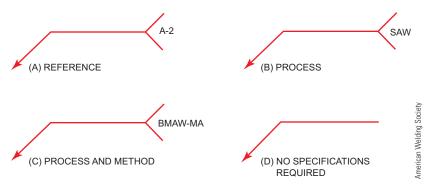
Locations of specifications, processes, and other references on weld symbols.
